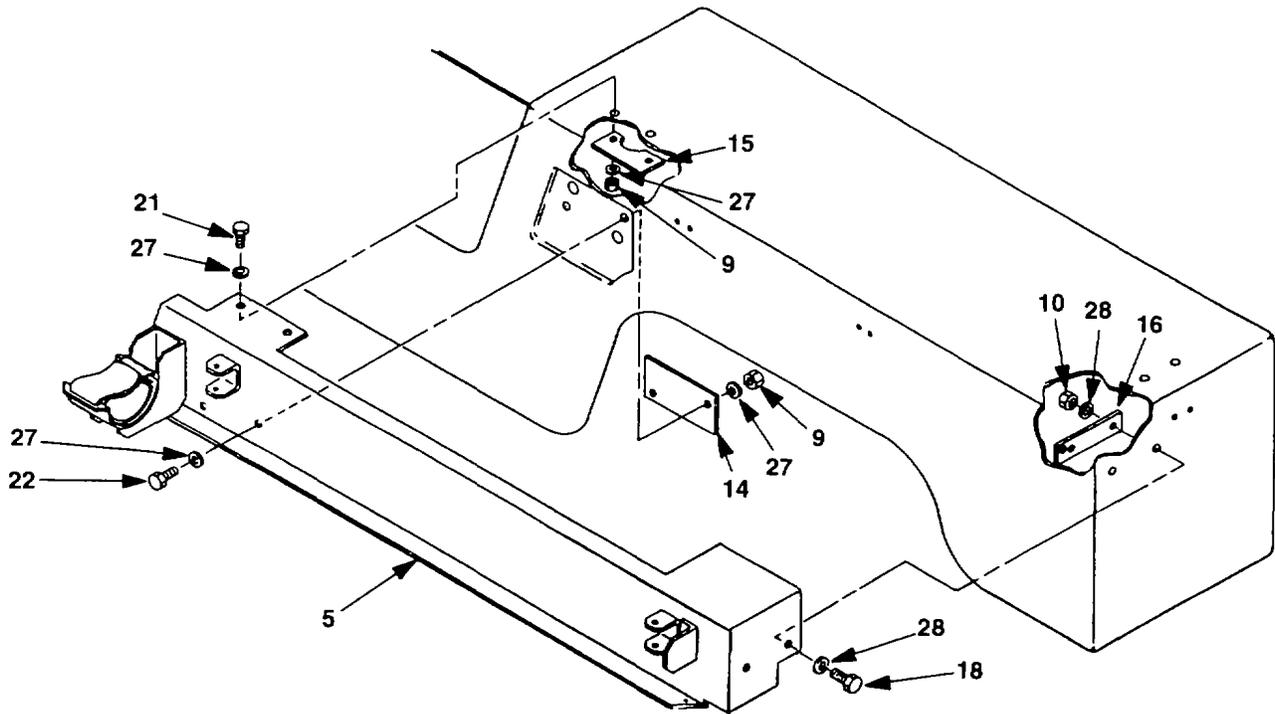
Universal HMMWV Mounting Kit and Mast Installation (Sheet 2 of 4)
